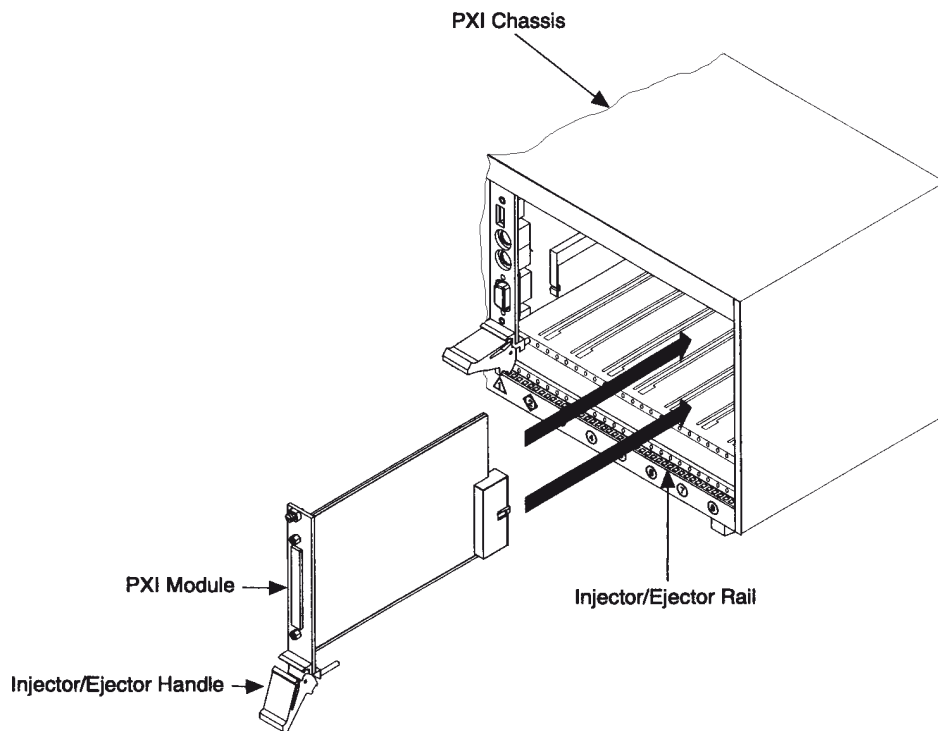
Installing the module into a PXI/Compact PCI Chassis
